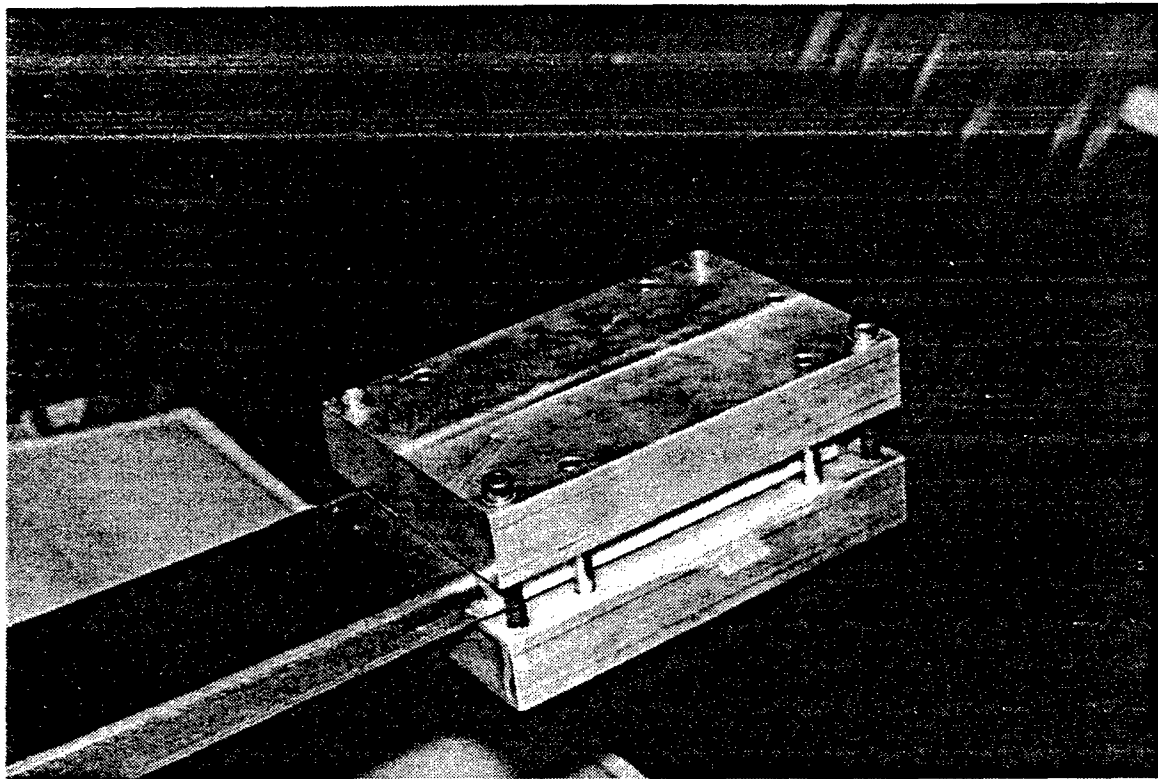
Fixture for Positioning and Bonding of Wear Pad
